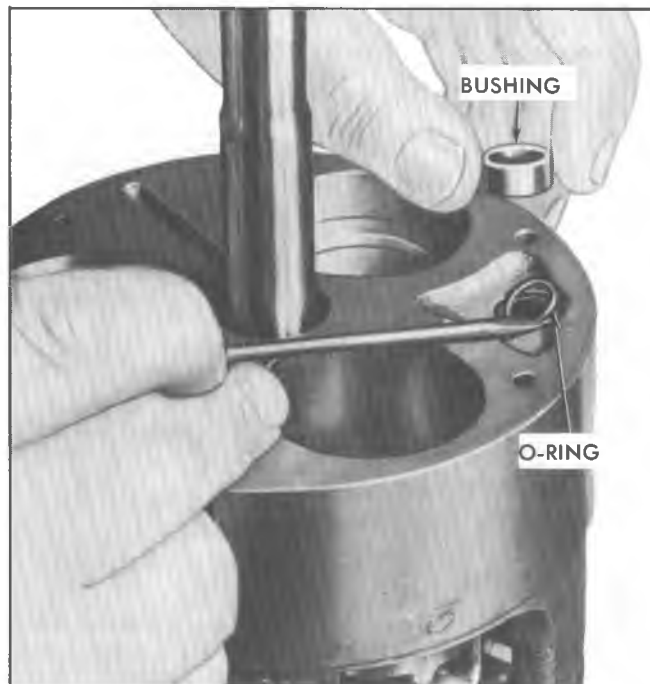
Installing O-Ring On Discharge Cross-over Tube
